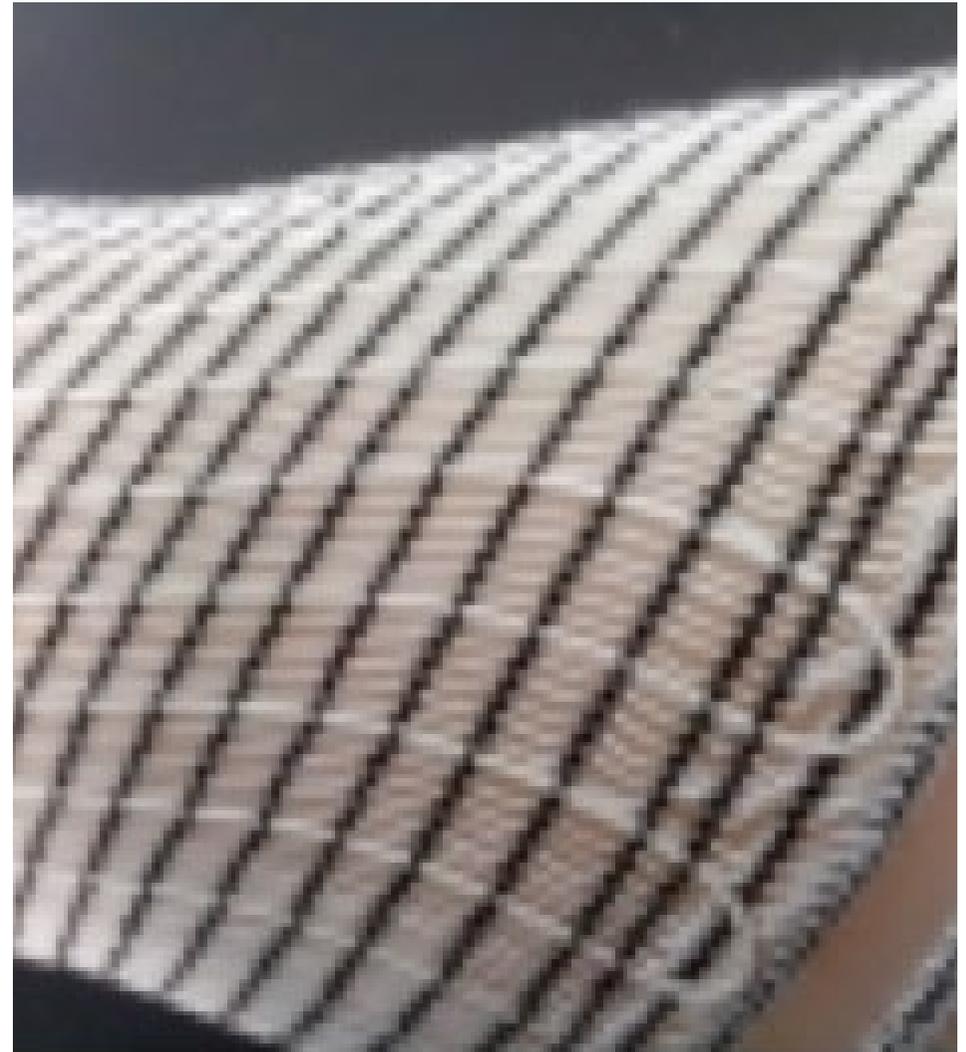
Shows a flexible fabric heating element which can be laminated into the mould to provide mould heating. Previously only silicon blankets were available to do this task (image courtesy of Tibtech Innovations)
